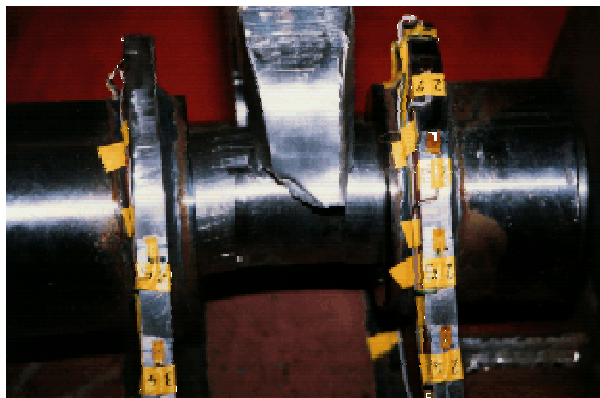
close up of broken visor lug and deformed locking bolt
